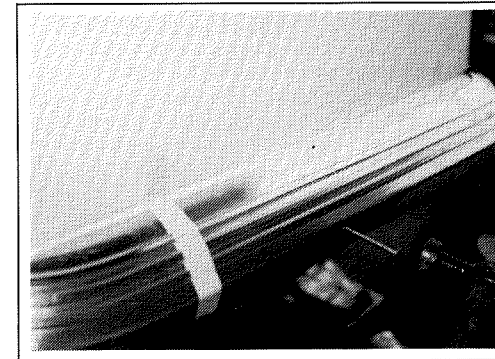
To fit, the trims were held in place with masking tape prior to marking and drilling the holes required...
